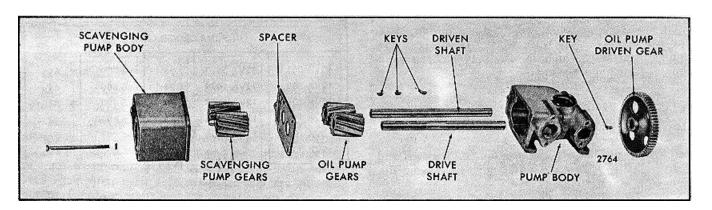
Lubricating Oil Pump Details and Relative Location of Parts (12V Engine)
